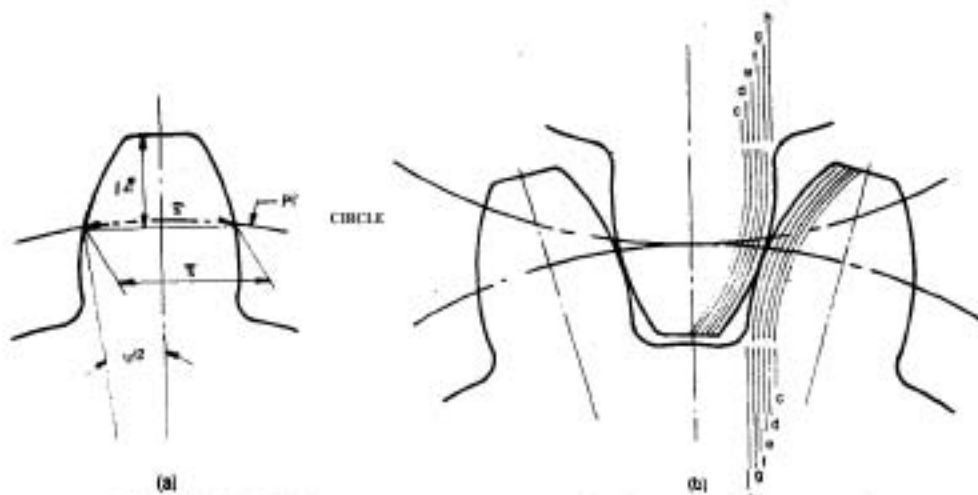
Thickness measurement and tolerance of gear tooth
